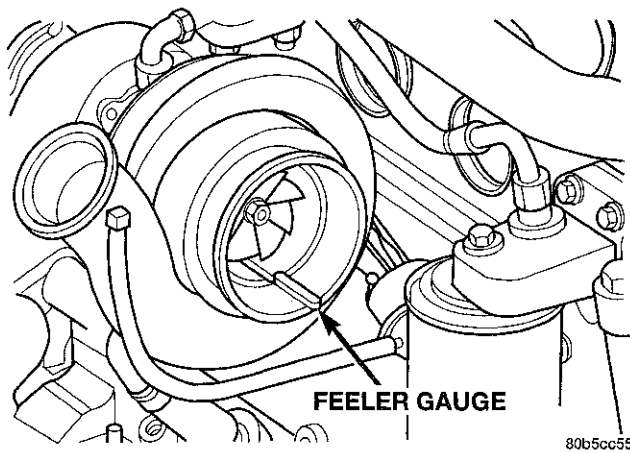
Measure Turbocharger Bearing Radial Clearance
